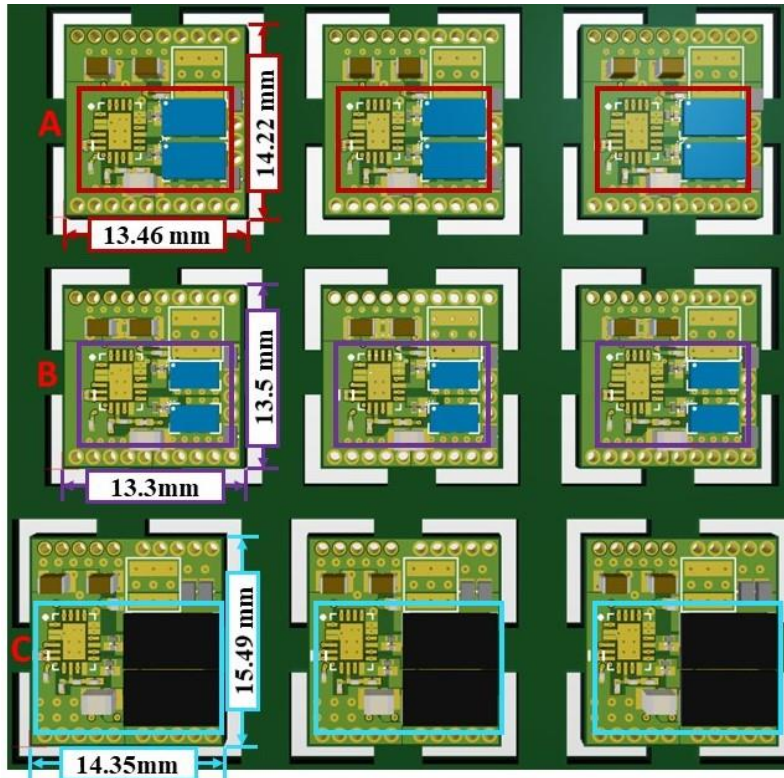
PCB Panel mechanical dimensions of converters under test: A) LTC7800 EPC2030, B) LTC7800 EPC2218, C) LTC7800 GaN Systems GS61008T at 3.3V, 1.8V, and 1.0V output
